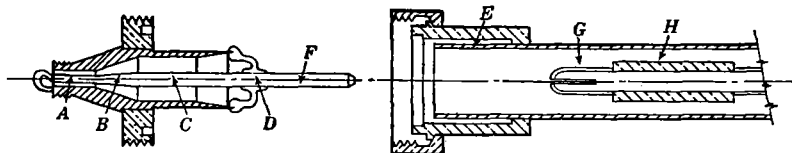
200-kw pulse-power coaxial output and coupling section with choke joint.
